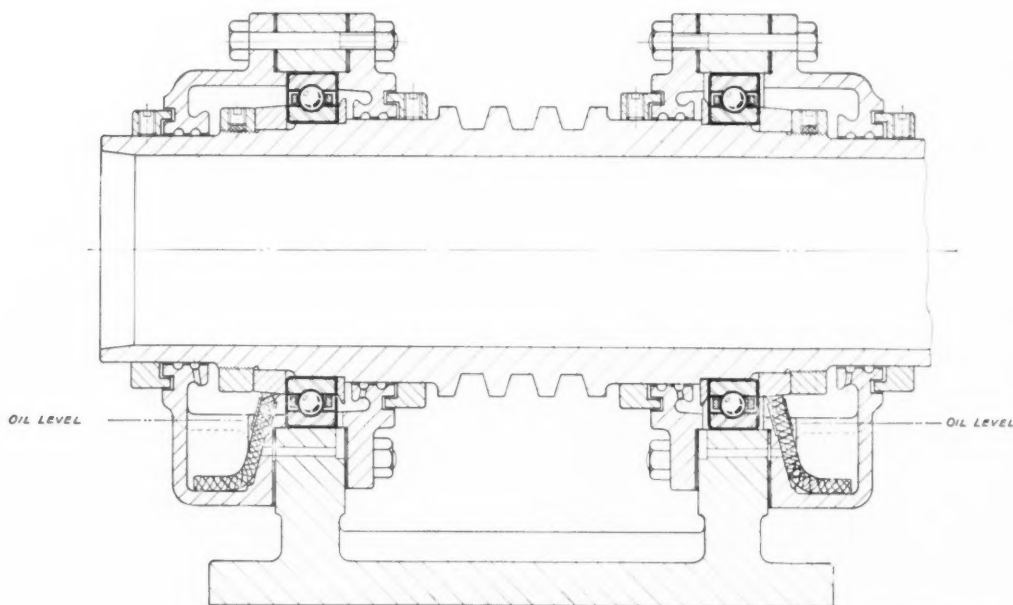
A special high speed spindle on a lathe headstock equipped with large bore extra light series ball bearings. To avoid excessive churning and heating of oil with possible loss, the oil level is kept well below the lowermost moving parts. Wick feed provides for adequate oil circulation to the bearings, the returns carrying the oil back to the sumps in each bearing cap. Labyrinth slingers prevent entry of foreign matter.
